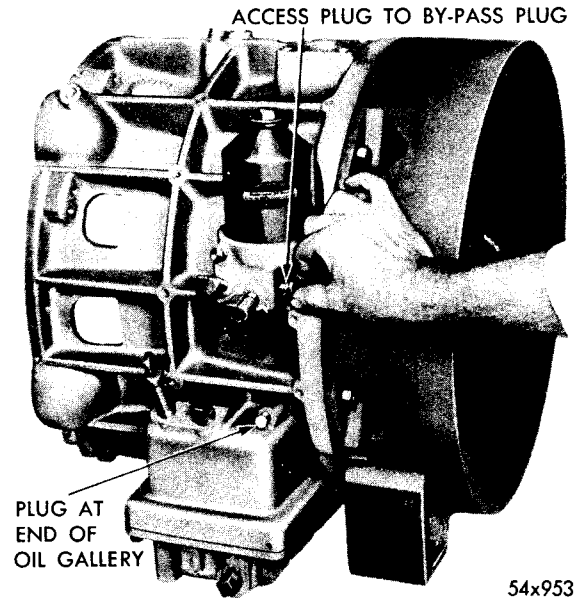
Removing or Installing the Access Plug to Oil Cooler By-Pass Plug
